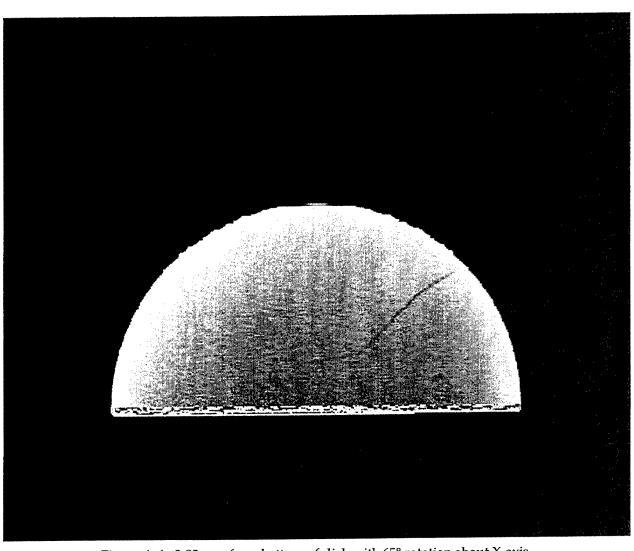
3.82 mm from bottom of disk with 65° rotation about X-axis.
